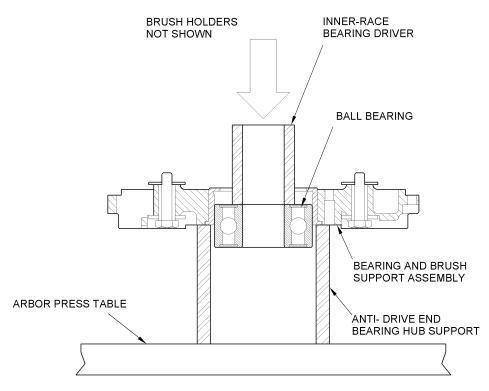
Removing the Anti-Drive End Ball Bearing
